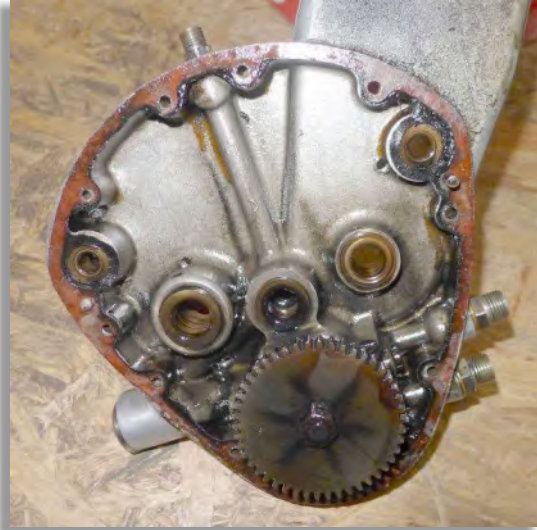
The inner side of the timing case. Note the large gear of the oil pump and the bushes for the camshafts and rocker arms. The central bush above the gear feeds the oil pipe towards the big end via the hollow crankshaft.
